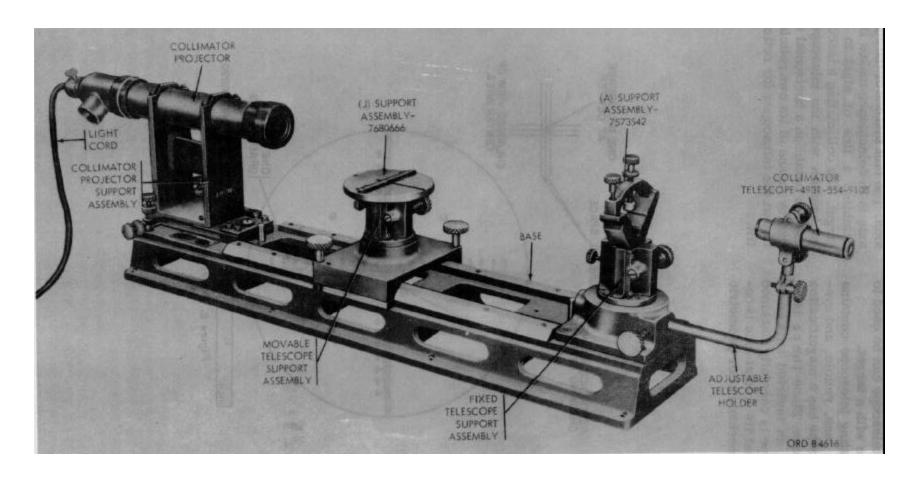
Telescope test fixture 4931-608-5434 and associated equipment.
